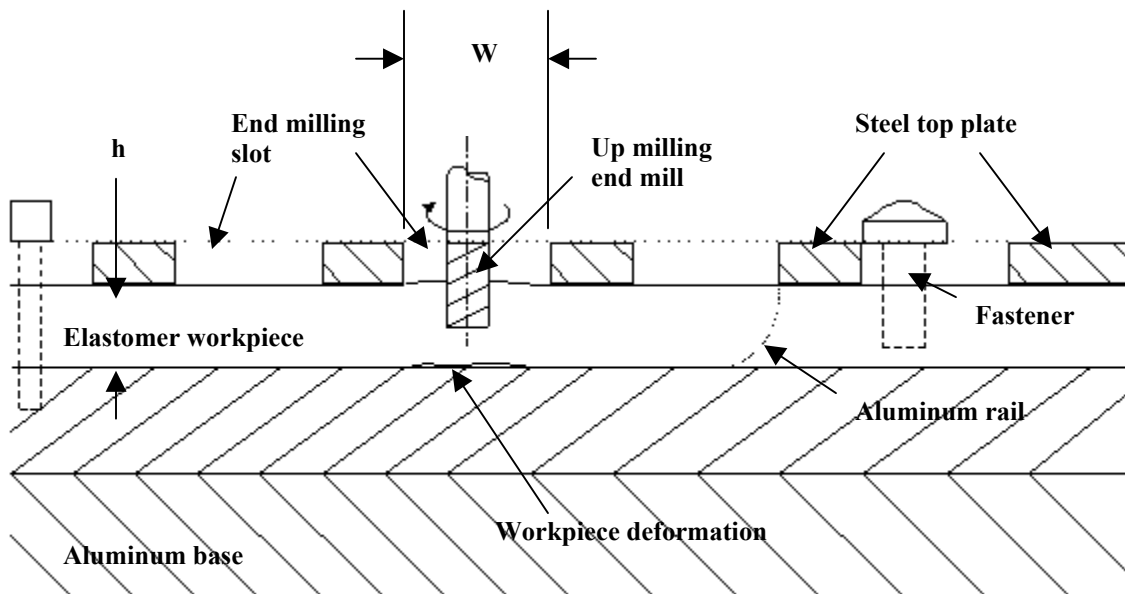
Cross section A from Figure 4.1 of fixture for elastomer machining showing end milling slots and workpiece deformation.
